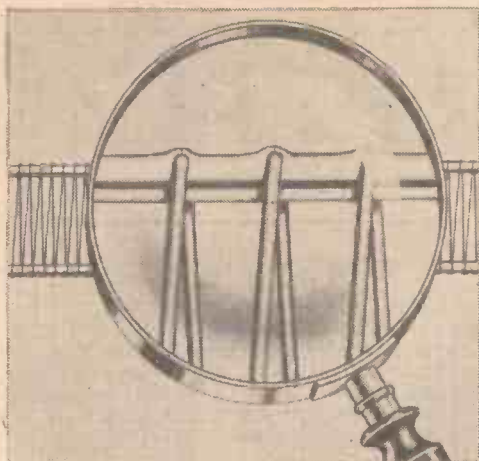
Finally the grooves are burred over, fixing the grid wires immovably.
